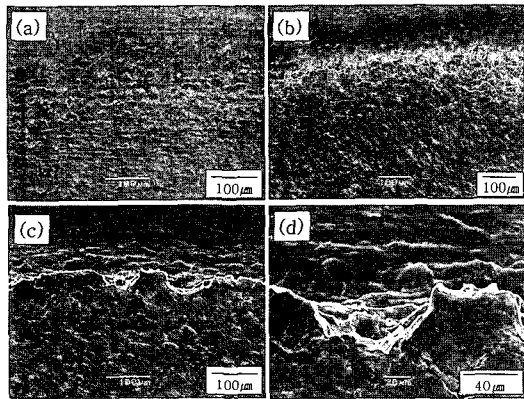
High magnification SEM images of fracture surfaces after tensile shear test with tool insertion depth: (a) 1.45, (b) 1.5, (c) and (d) 1.65mm
